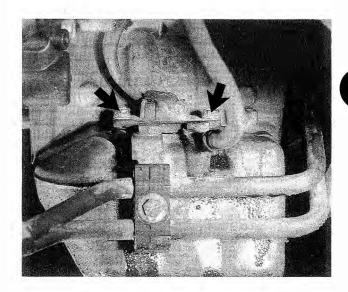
Oil level sensor mounting nuts (arrows). Oil level sensor wiring harness can be separated at connector near bottom of alternator.
